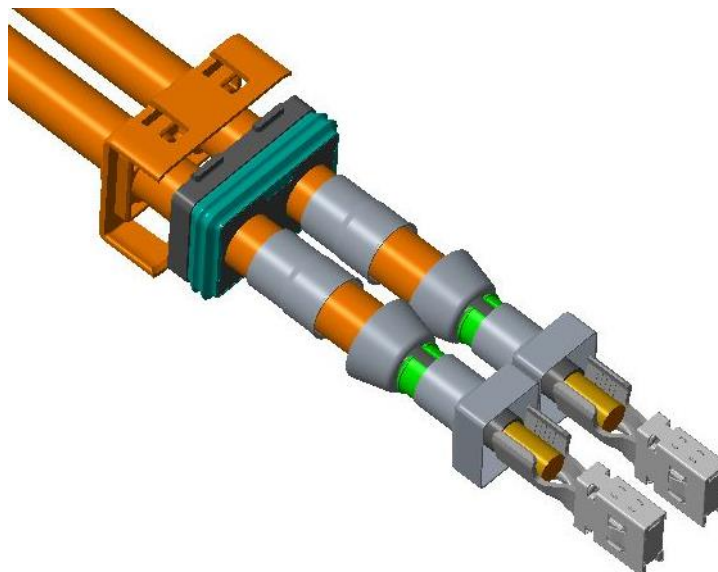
Components configuration for contact crimp / Komponentenordnung für Kontaktcrimp
